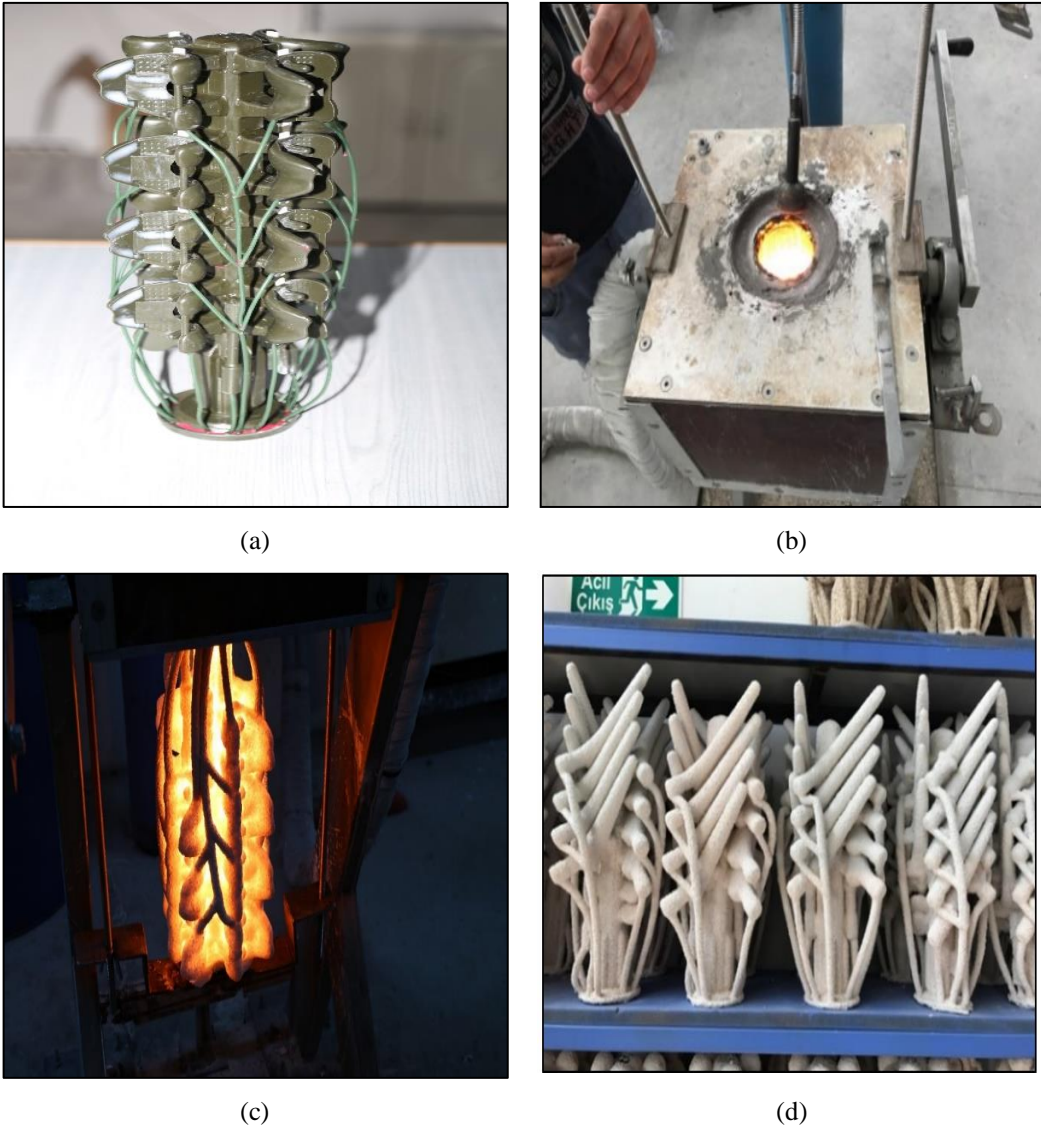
(a) Pattern creation, (b) Melting of ASTM F-75 alloy, (c) Pouring, (d) Cooling of mold
